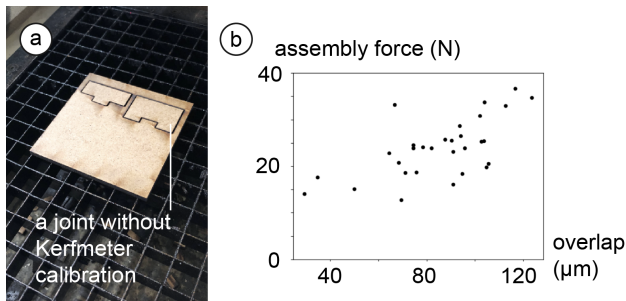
(a) To understand whether the variation of kerf and assembly comes from Kerfmeter or laser cutter, we also cut and measured 30 identical one-box joints without Kerfmeter calibration. (b) The result of measuring the assembly force of one-finger box joints without Kerfmeter calibration.
